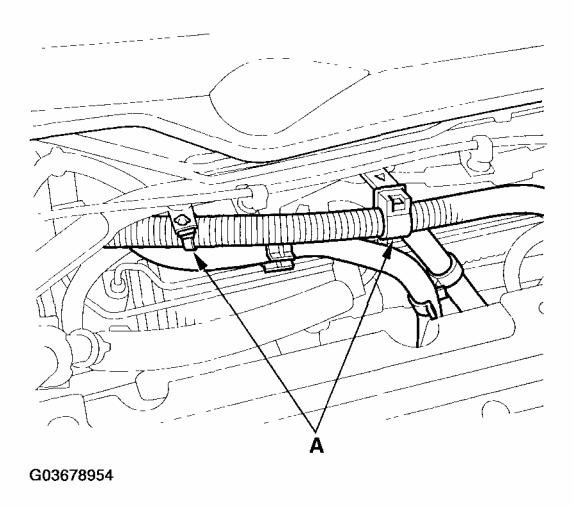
Removing Engine Wire Harness Clamp And Clip From Two Mounting Brackets
